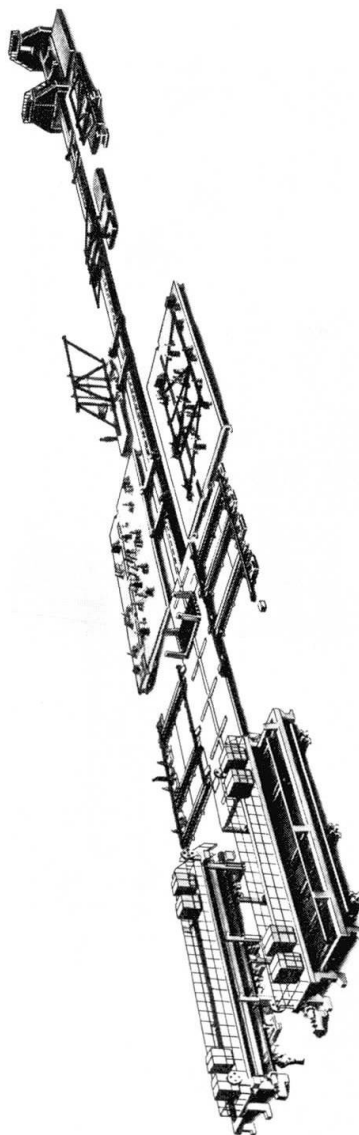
General view of flow line for assembly and welding of roof-trusses made of tubes.
